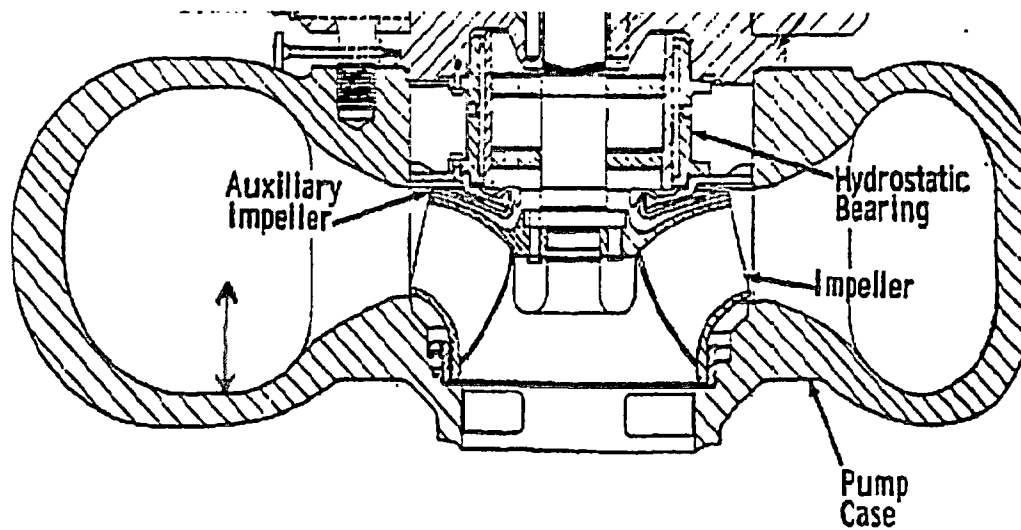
Reactor Coolant Pump Showing Impeller Spill Height
